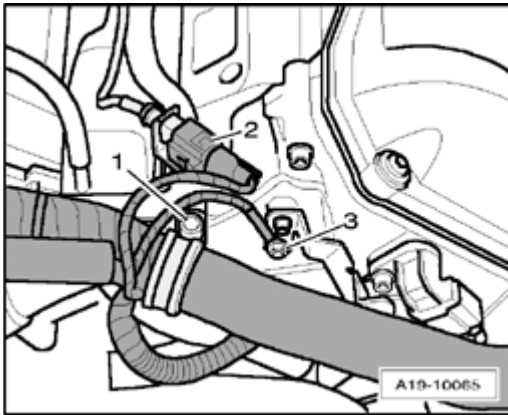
Harness Clamp, Map Controlled Engine Cooling Thermostat F265 Electrical Connection & Ground Wire
